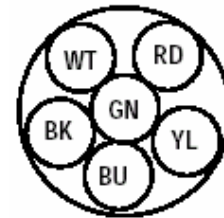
FOR EASE OF CONNECTOR ASSEMBLY, INSTALL ON END SHOWN
